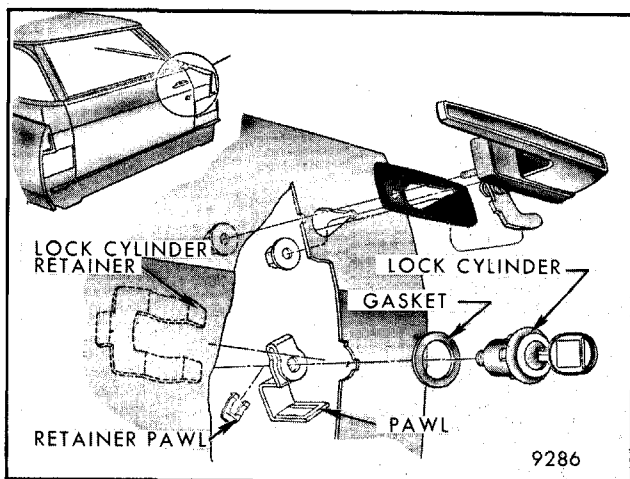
Tailgate Lock Cylinder and Outside Handle
